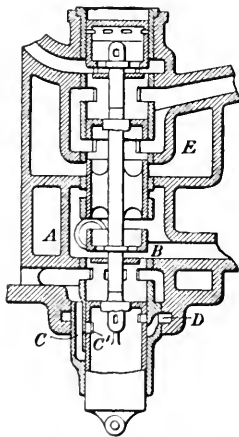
OPERATING VALVE OF SINGLE-BLOW PNEUMATIC FORGING HAMMER
